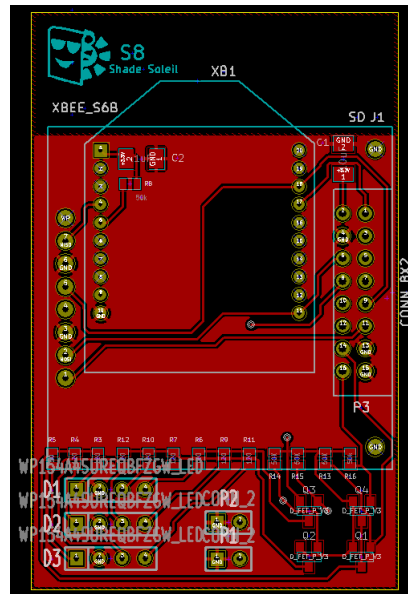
Top layout for PCB S6. This board is 40.8x64.3 mm (1.605"x2.53").
